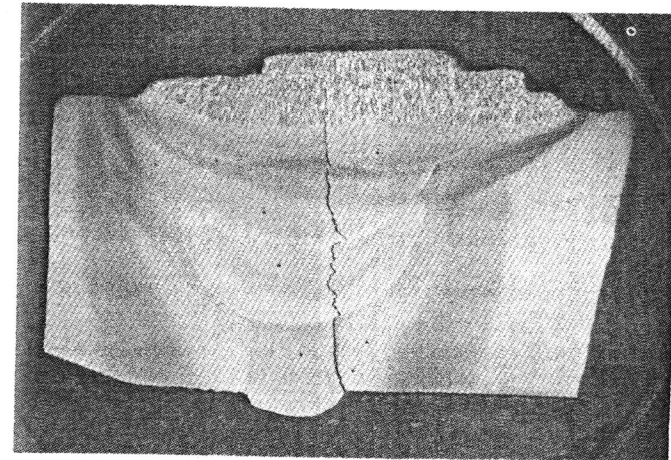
Hydrogen Cracking in Weld Metal x 4
